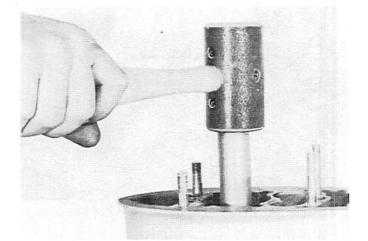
Removing and Installing Drive Shaft Needle Bearing in Gear Housing
